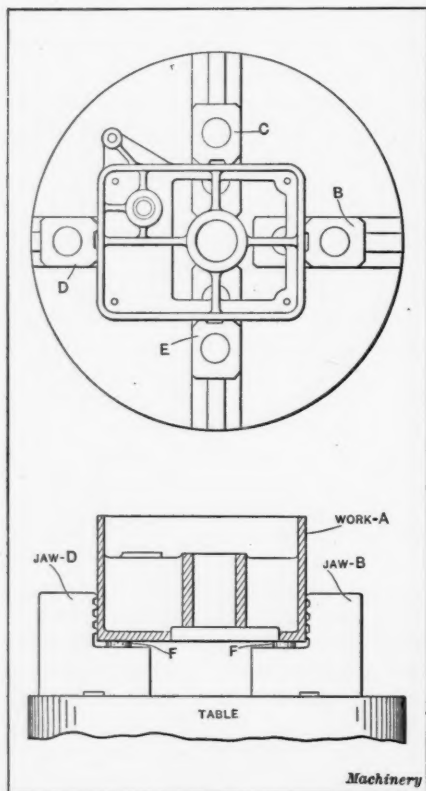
Use of Four-jaw Chuck for holding Rectangular Work on a Vertical Lathe or Boring Mill
